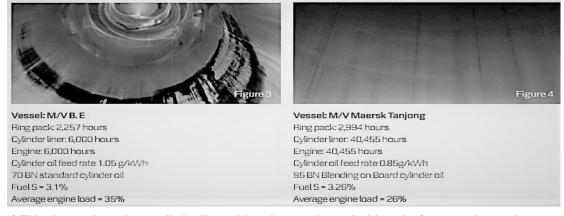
This picture above shows cylinder liner with carbon patches and without it after operating on slow steaming.
